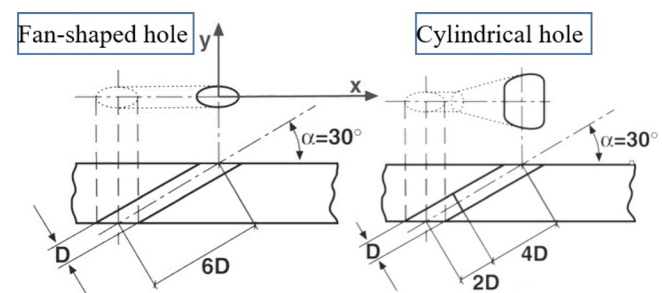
The geometry of film cooling holes: left (a) fan-shaped hole and right (b) cylindrical hole.<sup>17</sup>
